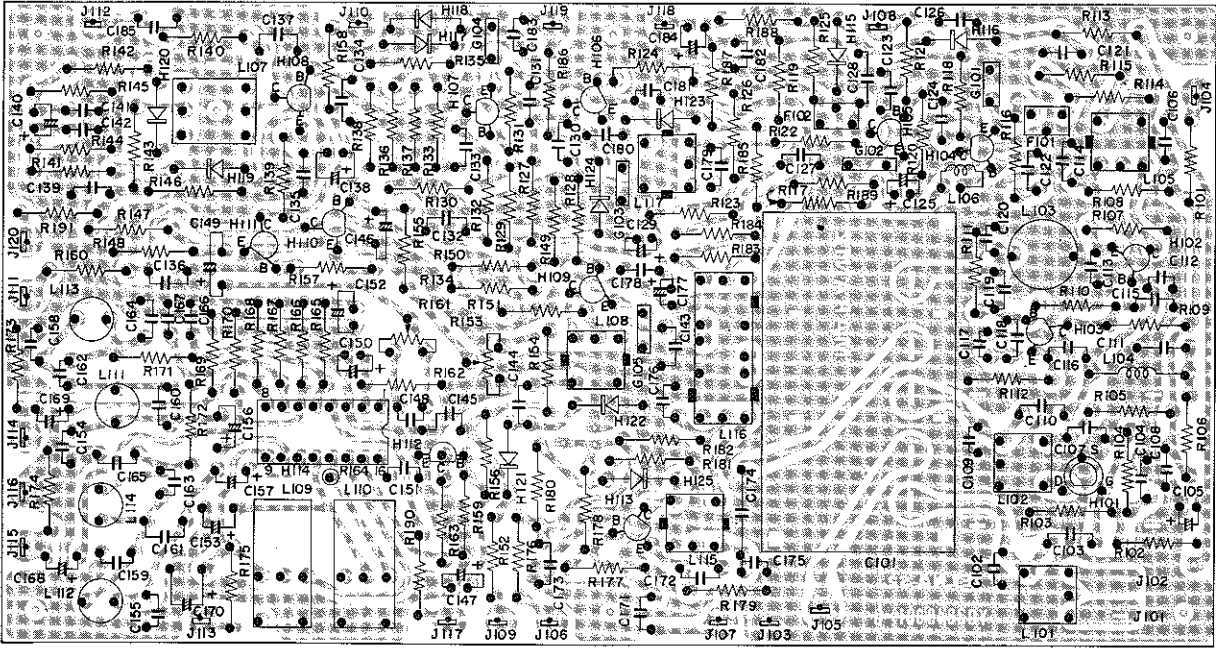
FM/AM Tuner Assembly P100 Component Locations
